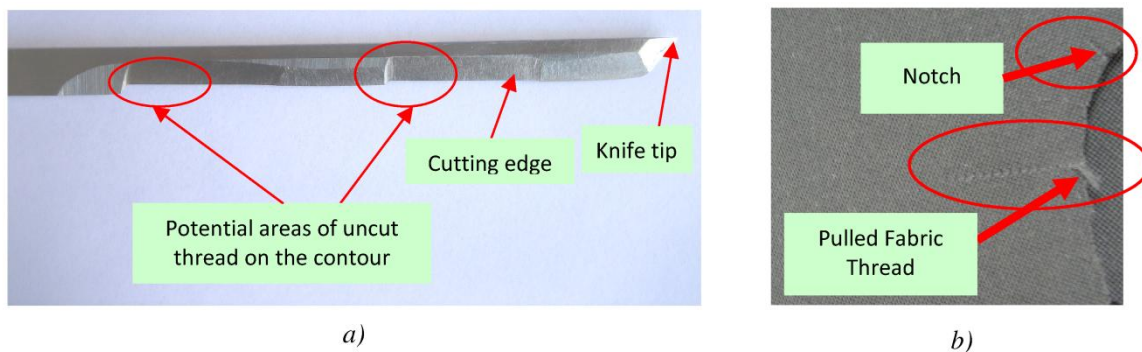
Samples: a) Irregular knife sharpening; b) Pulled fabric thread "28D" and notch "68B"
